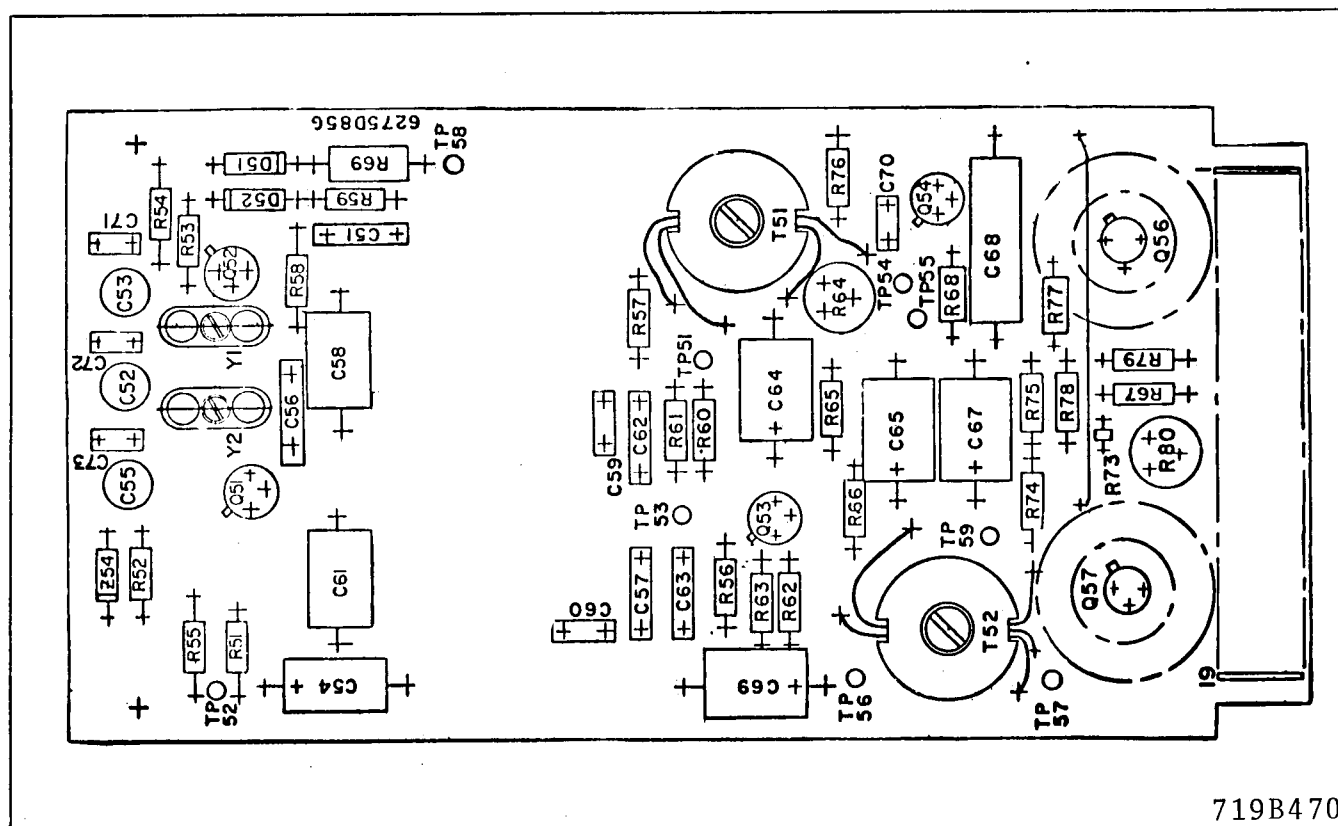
Component Locations on the Transmitter Printed Circuit Board.
